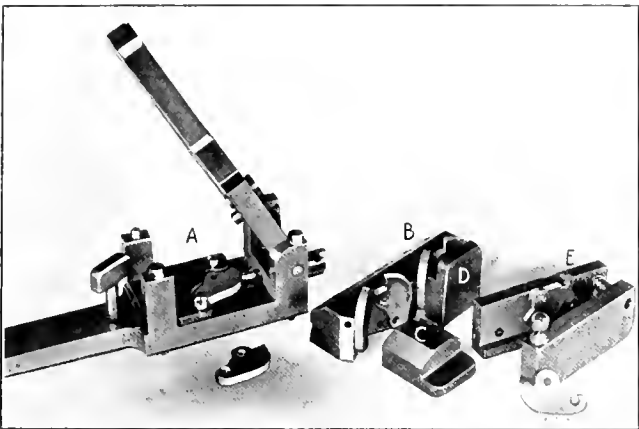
Drilling, Reaming and Milling Jigs for Moving Cutter Blades
